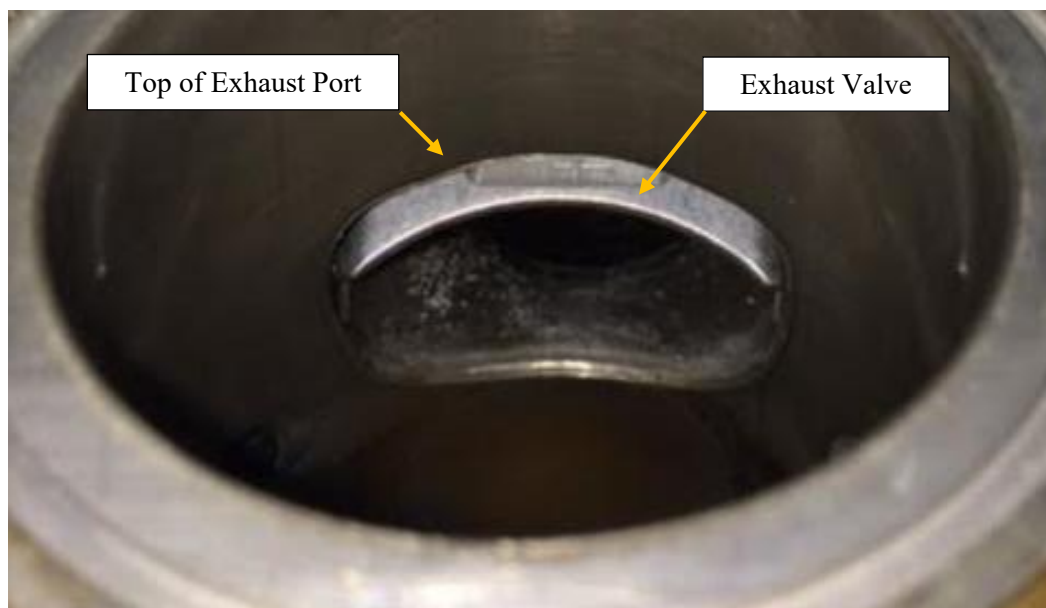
Photograph showing the exhaust valve in the exhaust port
